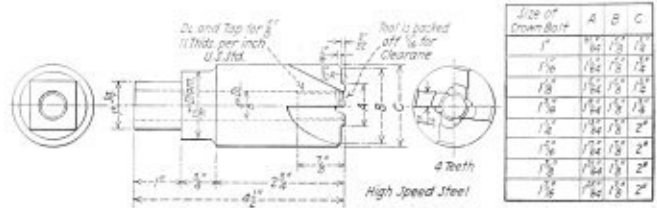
Air motor tool for use in counterboring holes in crown sheets
